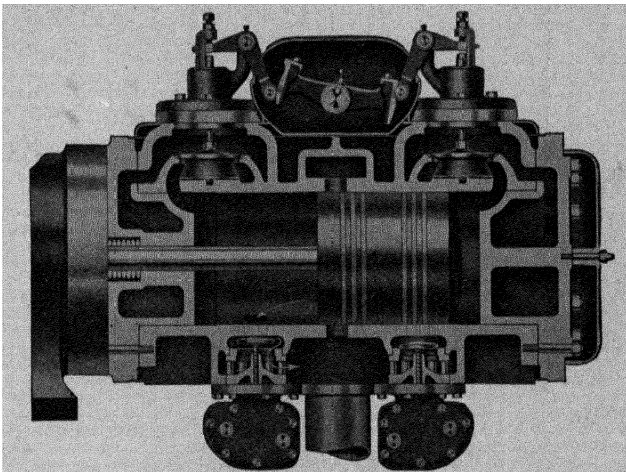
Section of Unafflow Engine Showing Central Exhaust Ports Closed and Exhaust Taking Place Through Auxiliary Exhaust Valve on Crank End
